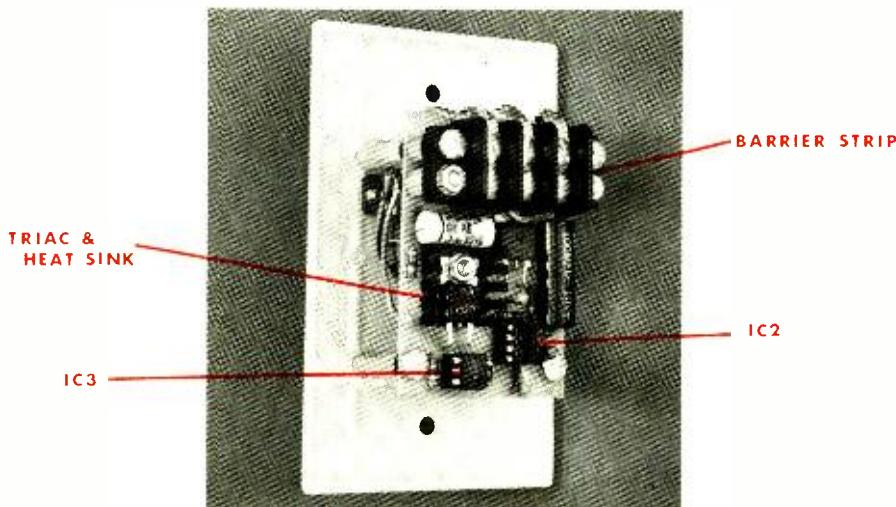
Photo of the back of the Smart Switch shows how pc board is mounted on a standard plastic cover plate.
